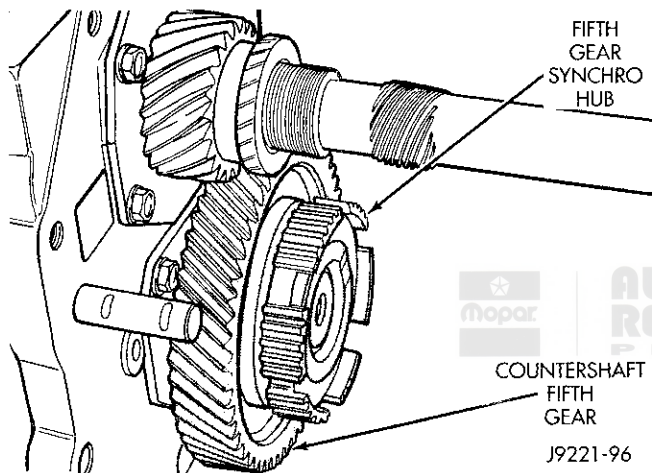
Removing Countershaft Fifth Gear And Synchro Hub Assembly
